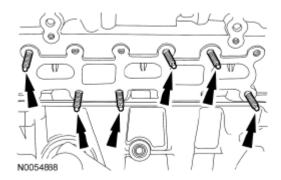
Locating LH Exhaust Manifold Studs Courtesy of FORD MOTOR CO.
